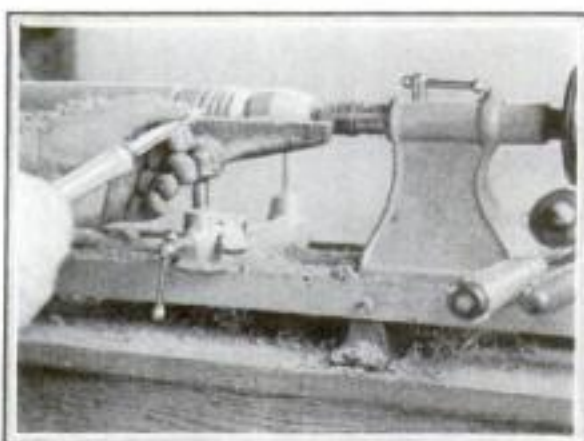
A diamond-point chisel is used for sinking the recesses between adjacent beads.
